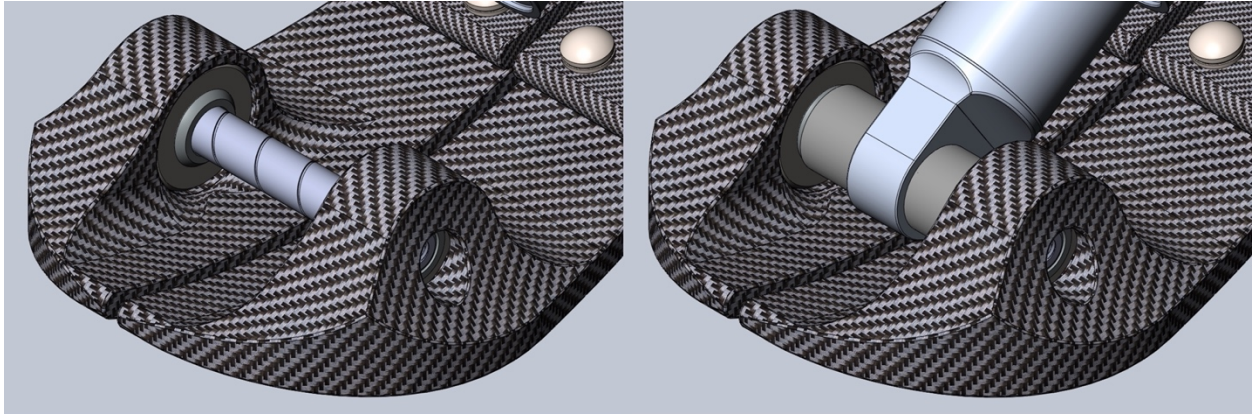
a) Foot Dowel Pin inserted in Spherical Bearings. b) Full front assembly with Fox Float Shock and Mount Kit.
